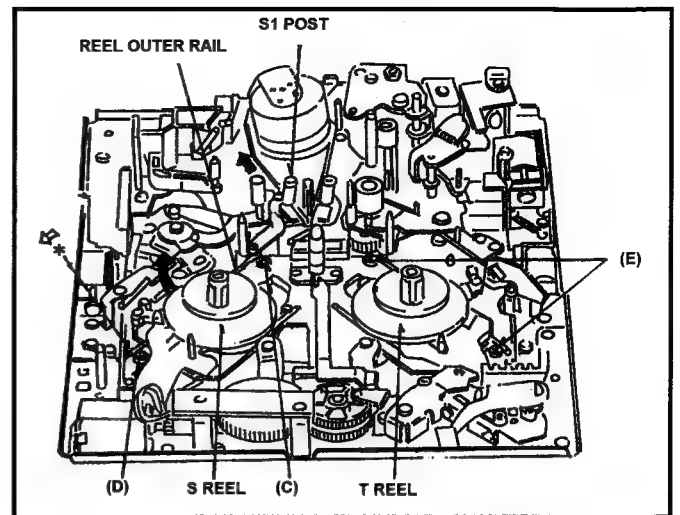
Removal of S & T Reel Rotor Unit
